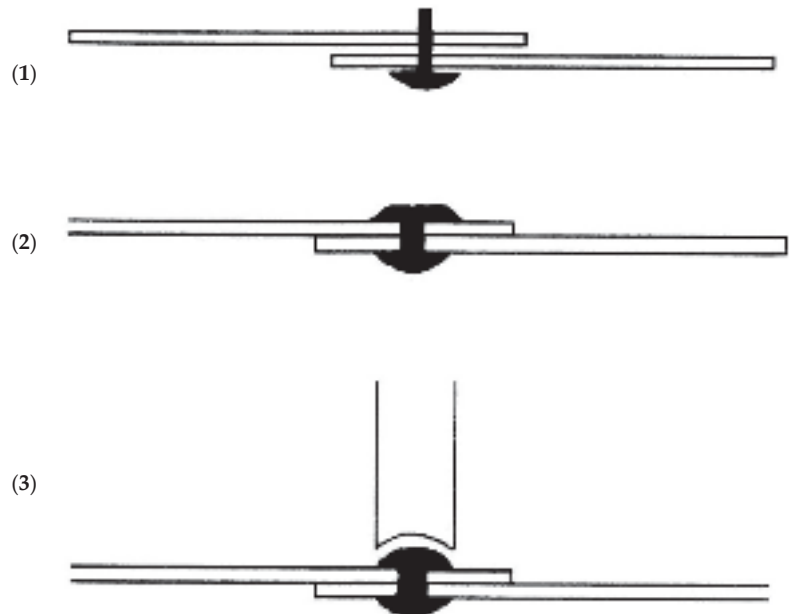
Rivets; two overlapping sheets. (1) Rivet pin with head; (2) deformation of second rivet head; (3) rounded rivet head and hollow punch (after Hodges 1964, Fig. 13).
